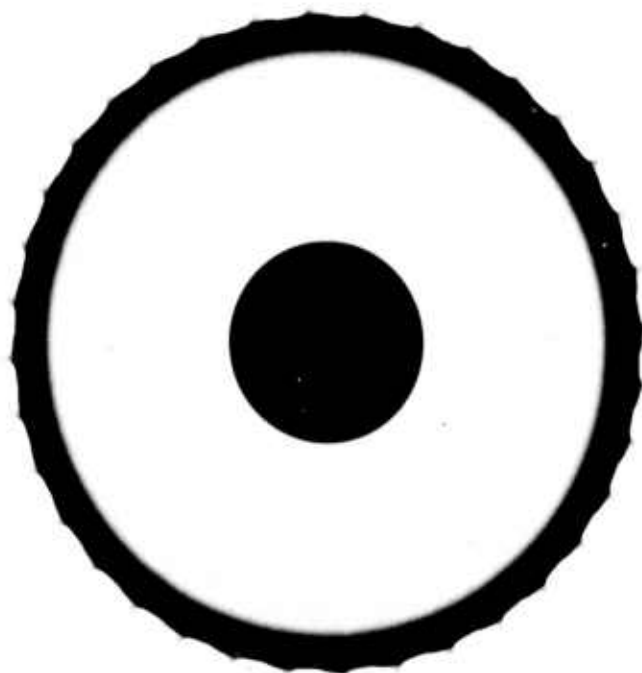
X-Ray Radiograph Showing As-Molded Rotor Ring With No Apparent Flaws
